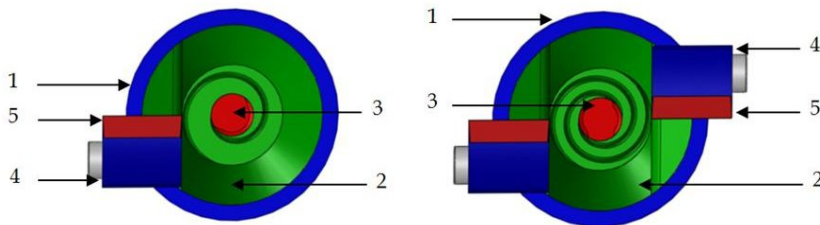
Top view sections showing the equality between the number of scrolls and the number of cutting inserts on the shoulder. (1) tool body, (2) shoulder, (3) probe, (4) cutting insert clamping, (5) cutting insert.
